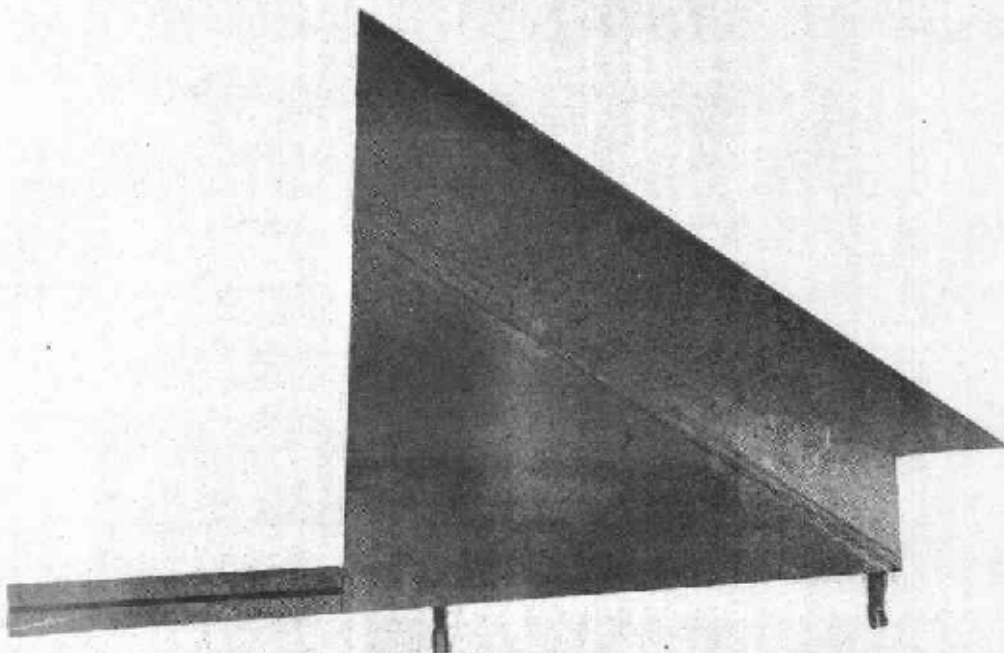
Side elevation of papreg fin. Note the smooth surface unimpaired by external fastenings, such as rivets.
